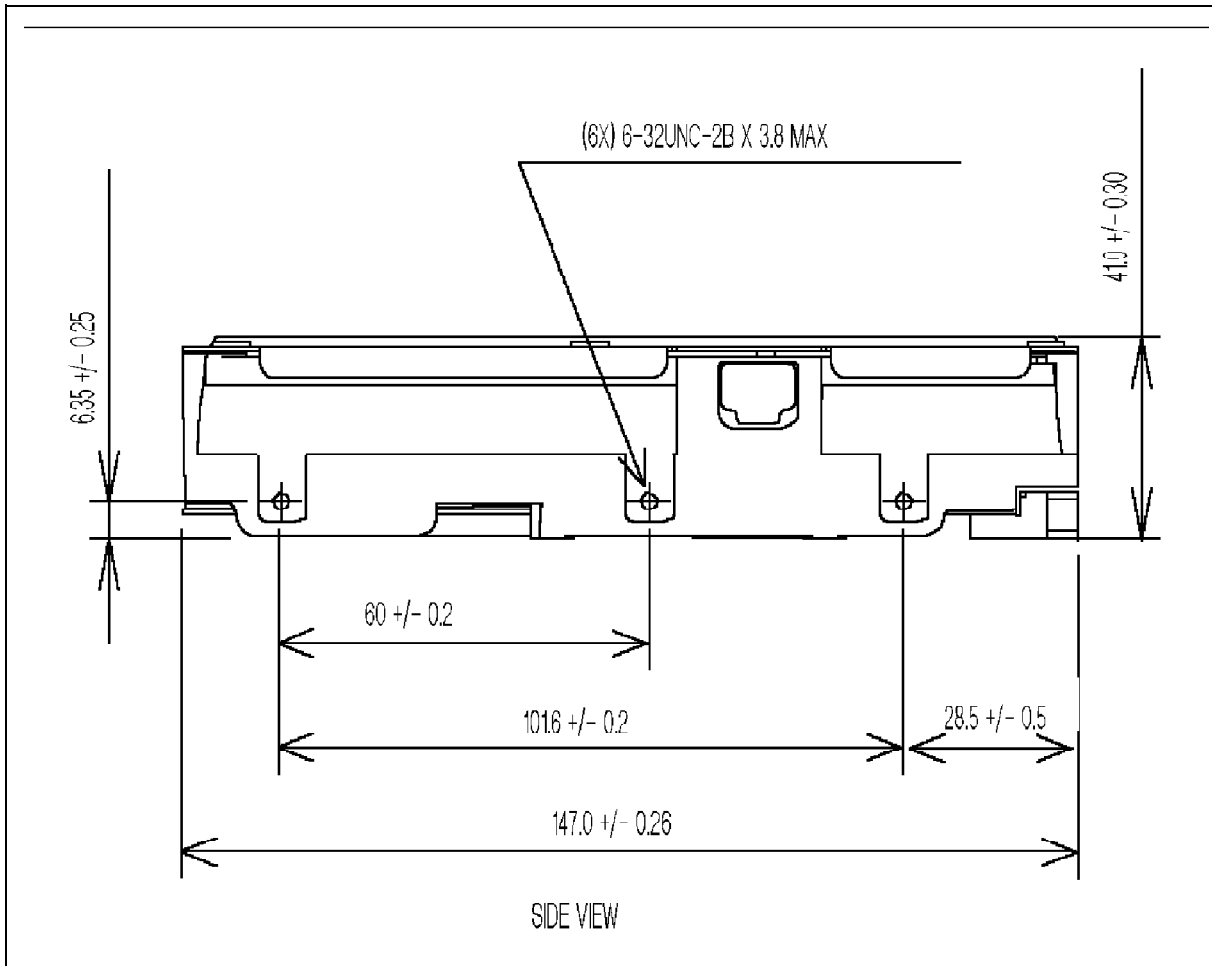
Location of Side Mounting Holes of 18.2 GB Model
